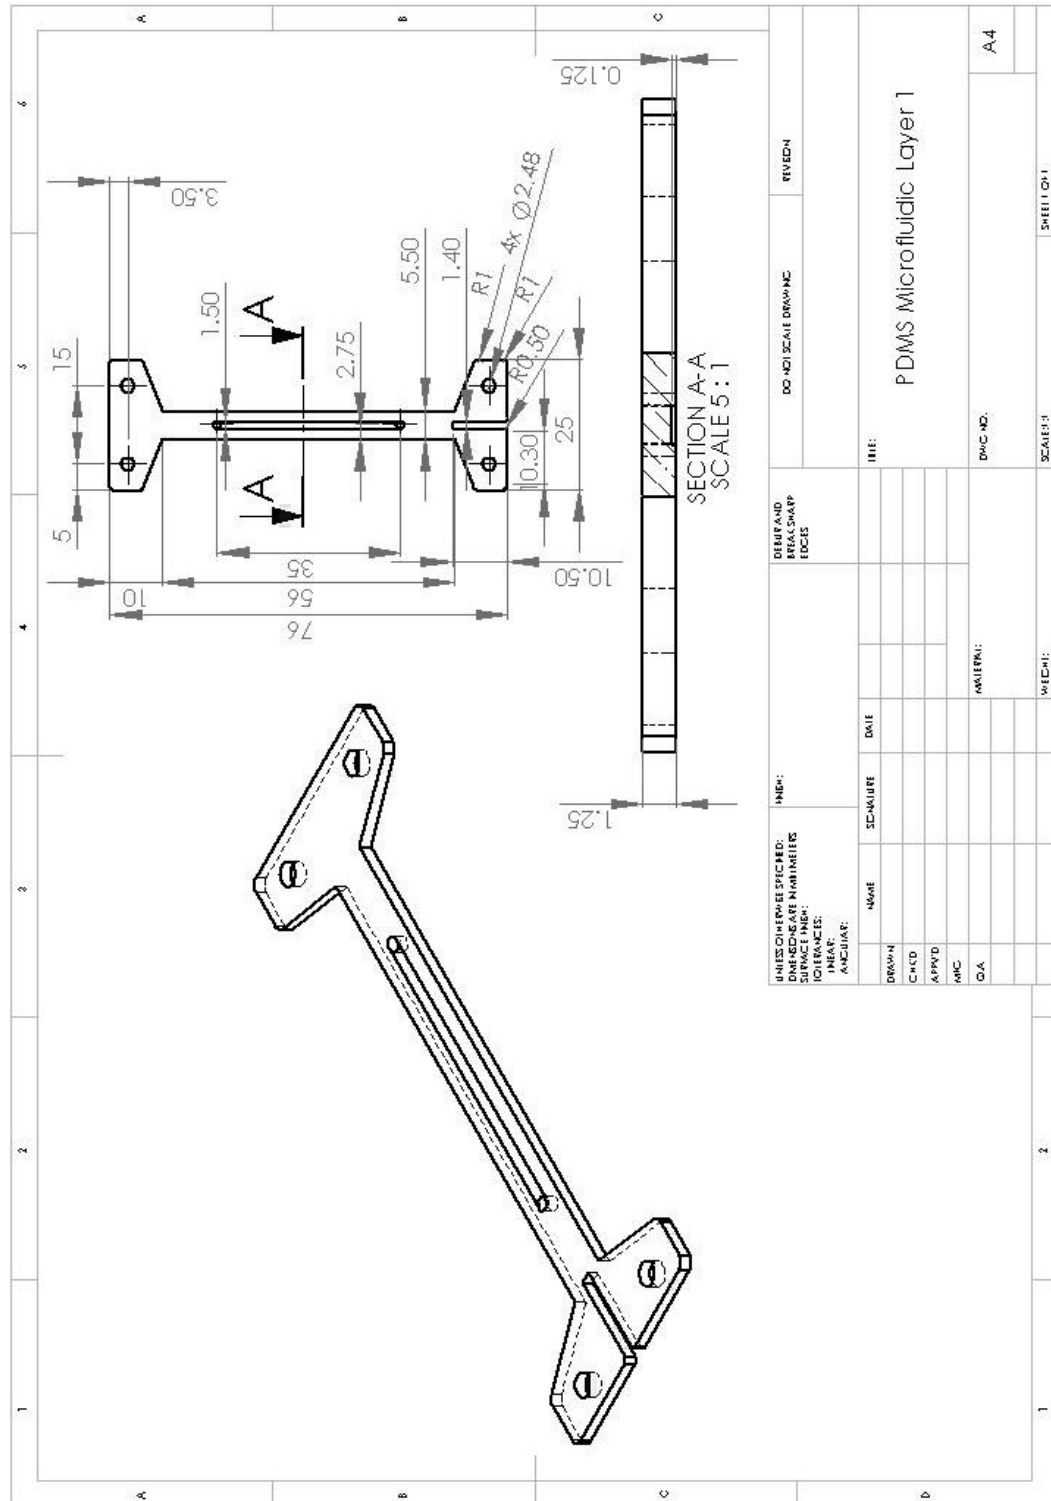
Microfluidic layer for the first generation packaging system - Dimensions in mm.
